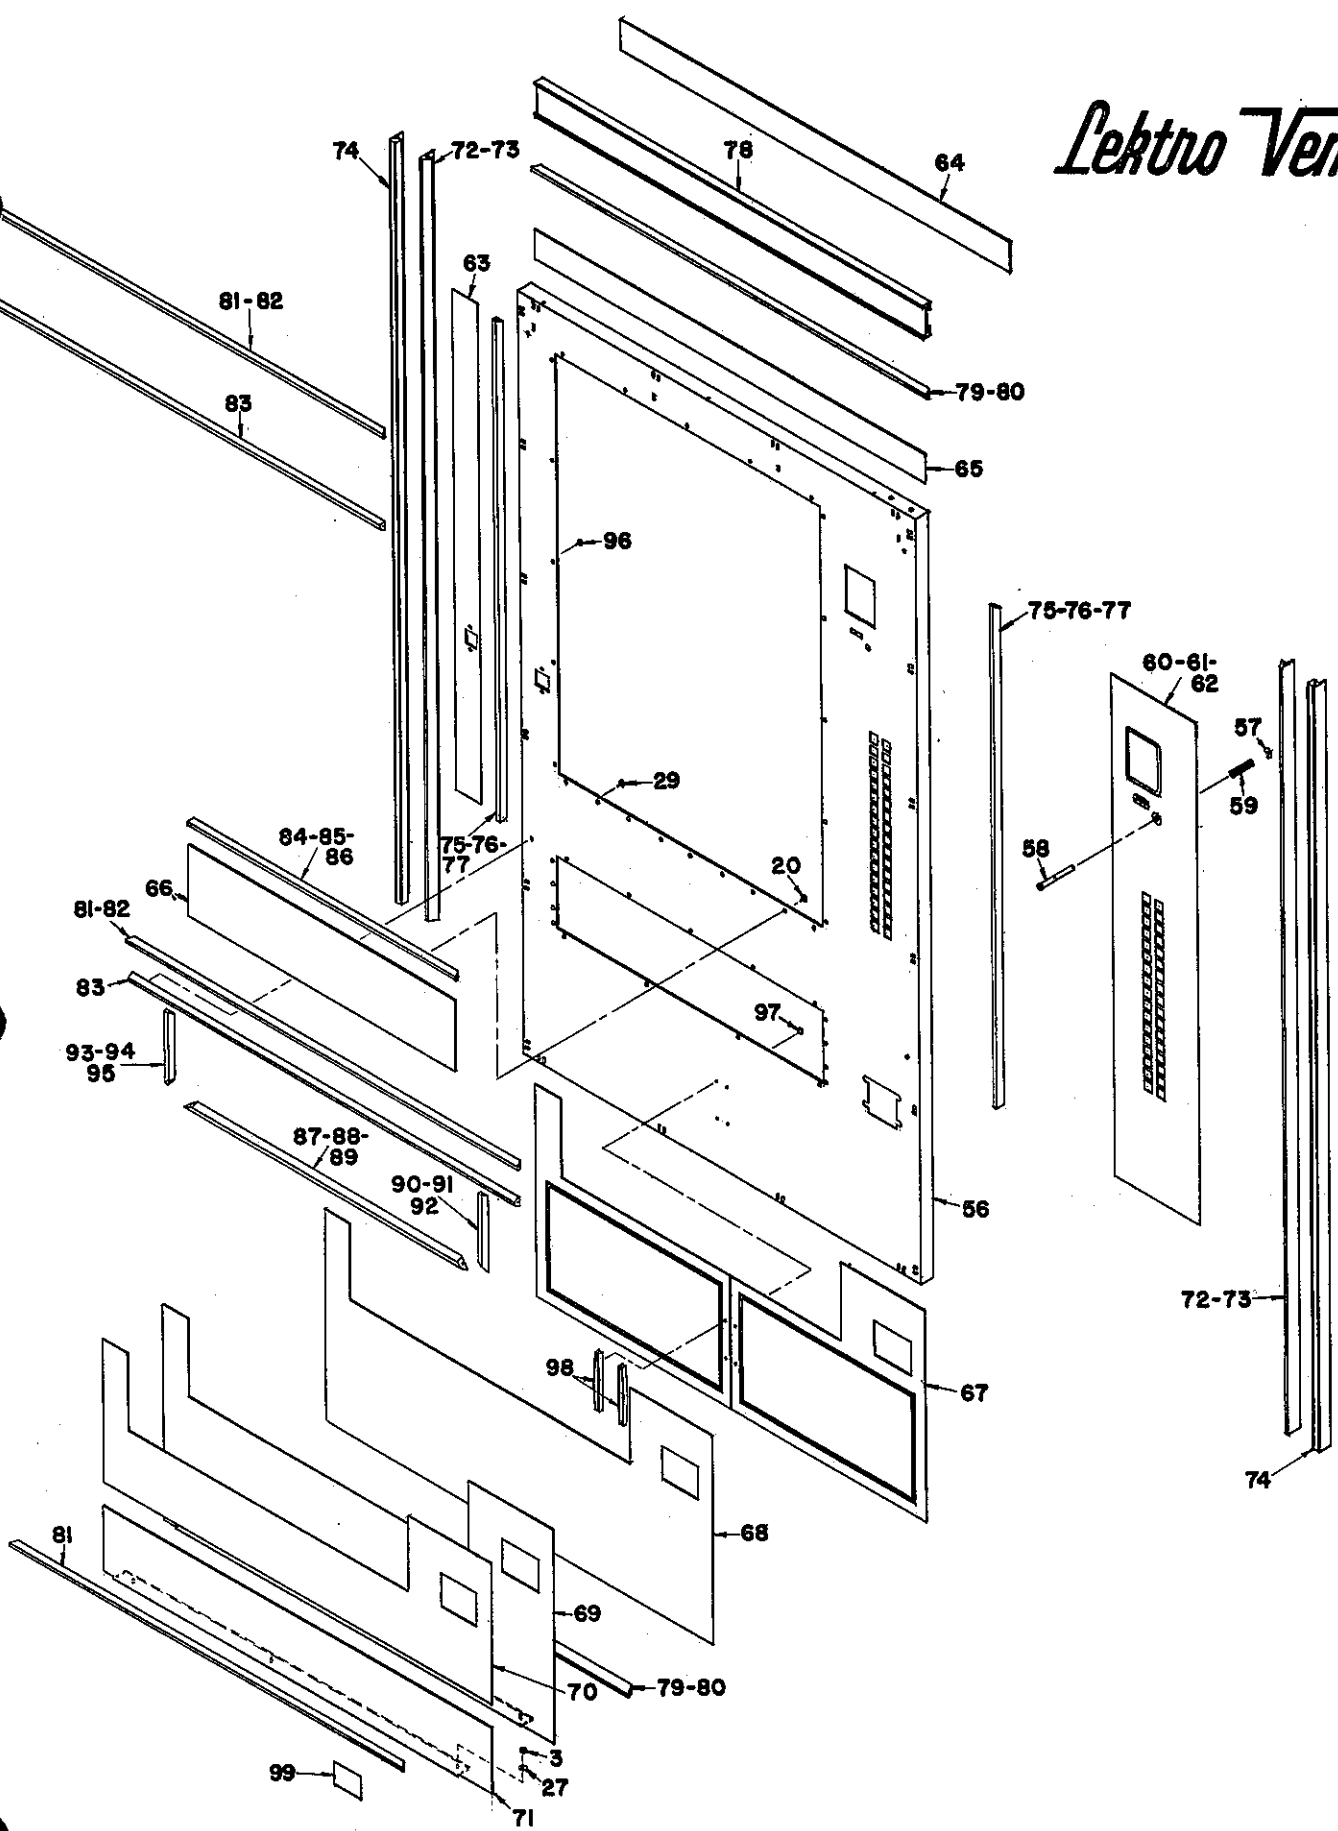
DOOR ASSEMBLY -- ALL MODELS
